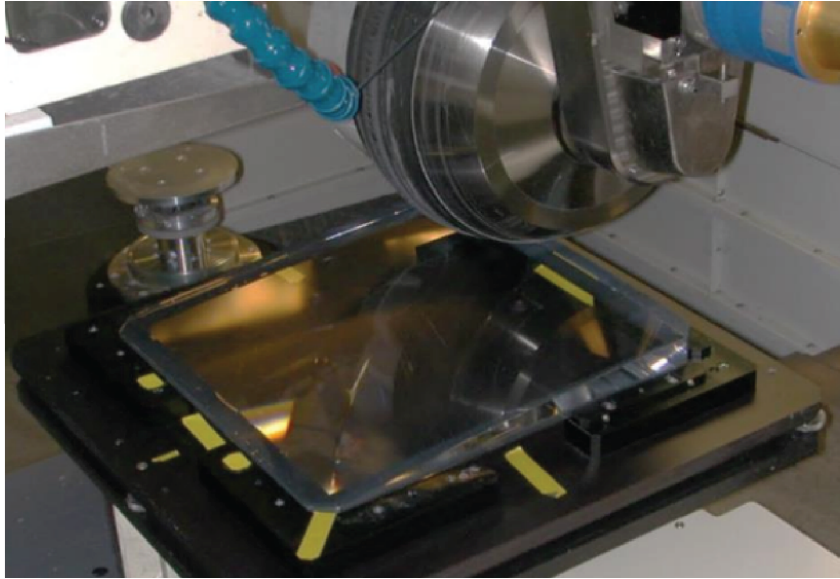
Small-tool polishing being performed on the aspheric surface of a NIF off-axis WFL using a MRF tool.
